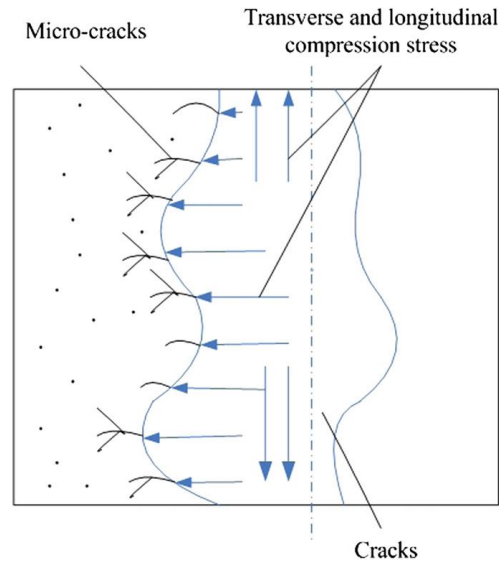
The structure of the micro-cracks on the cutting edge [29]
